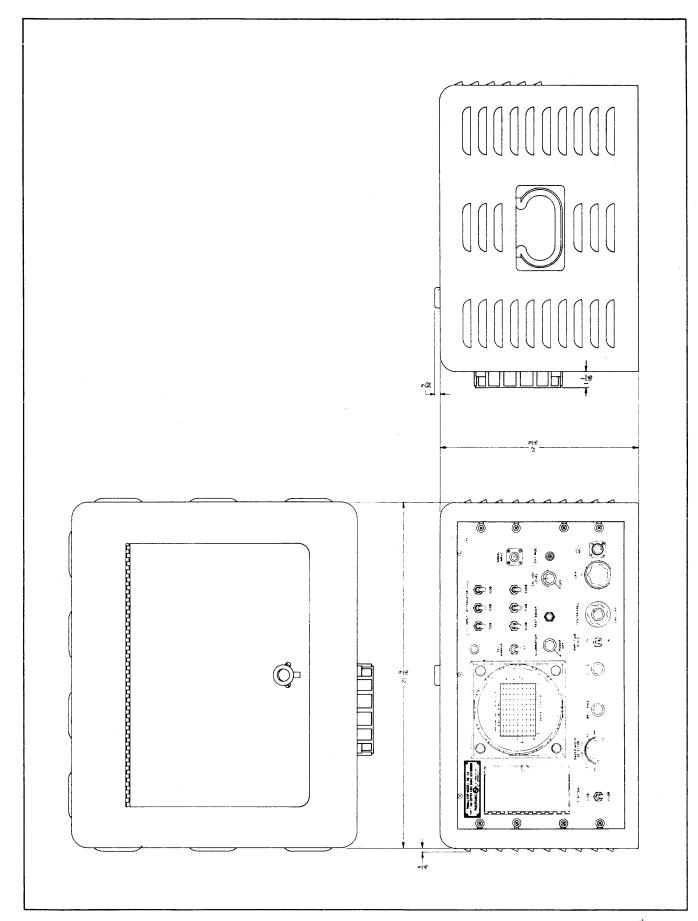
Outline Dimensional Drawing, Model SB-12a in Cabinet.
